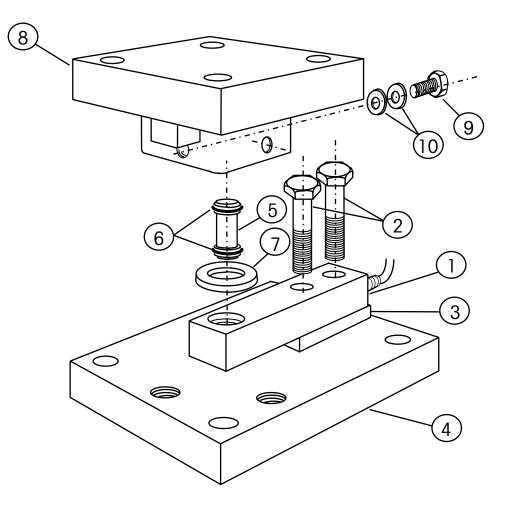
250-lb to 45,000-lb CENTERLIGN Assembly
